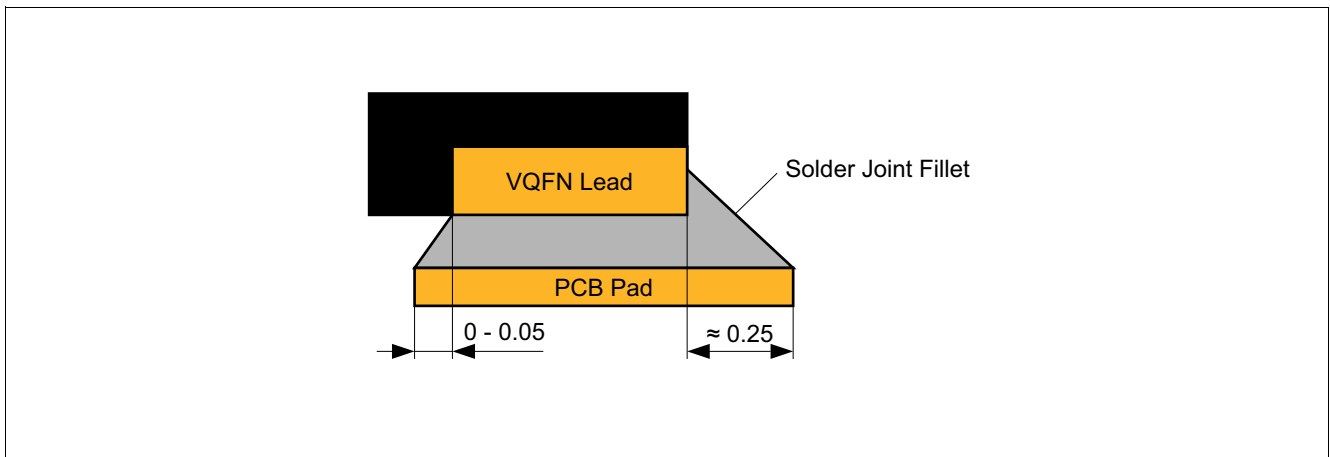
Schematic Cross Section of Perimeter Solder Joint
